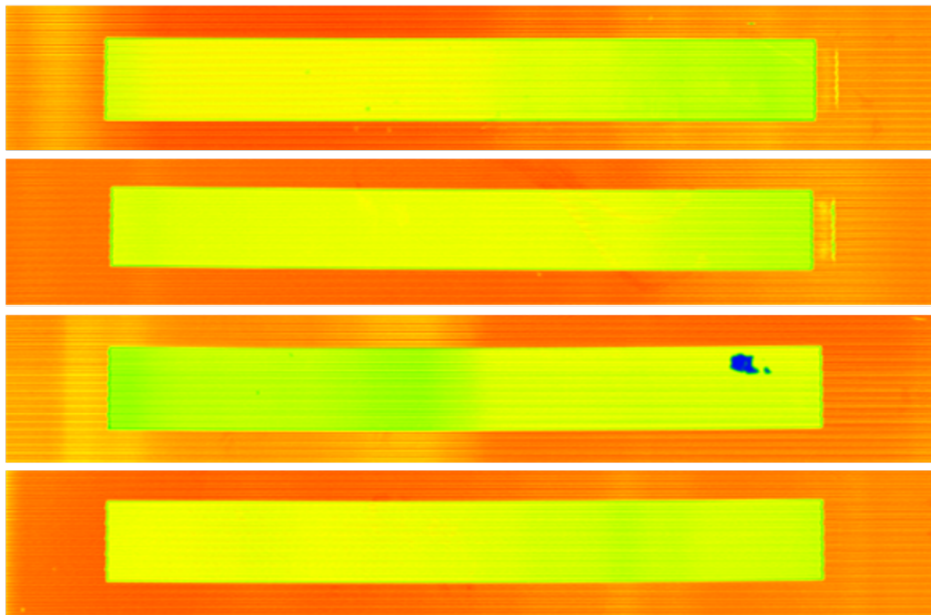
UT scans of the second batch of half-size plates with Zr coating. The third plate shows a defect, which is related to a coating failure.
